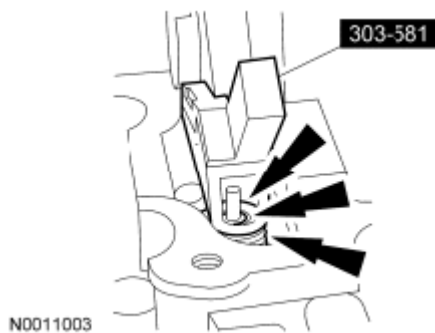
Locating Valve Spring Retainer And Retainer Keys
